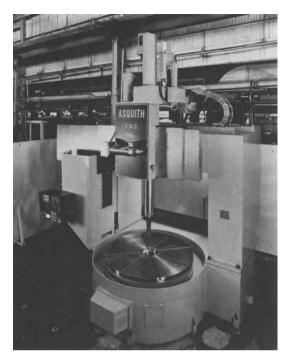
A CNC vertical turning lathe. [Courtesy of Asquith 81.]
